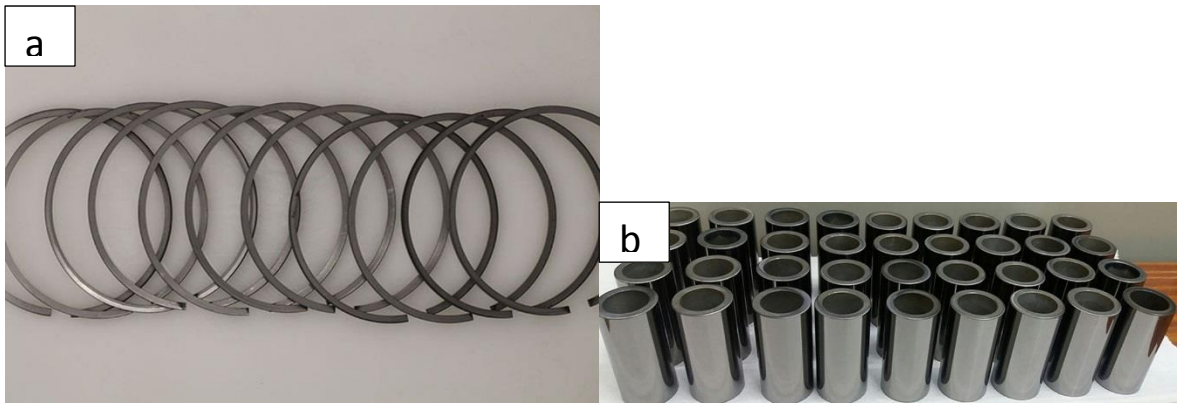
Mo-W- doped Carbon coated automotive components: a) piston rings, and b) tappets.
